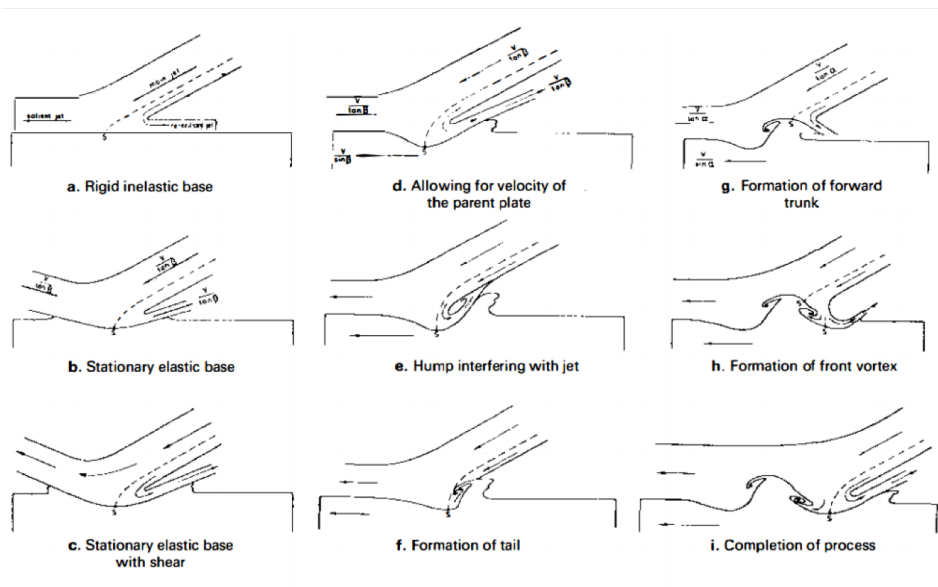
Schematics illustrating the parallel explosion bonding set-up as often used for larger plates, showing the situation at the impact zone during a rolling explosion [Wronka, 2014].
